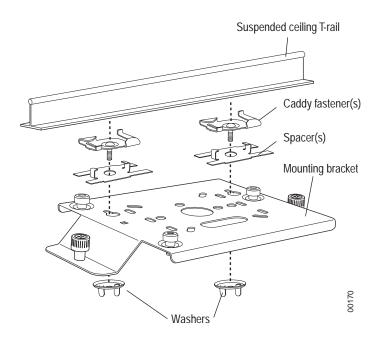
Mounting the AP150 to a Suspended Ceiling Rail
